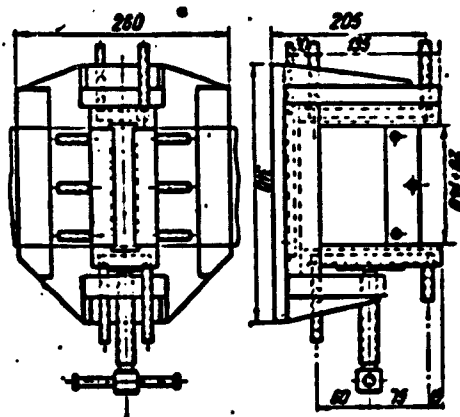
Copper chill mold for molten-slag arcless electric seam welding.
